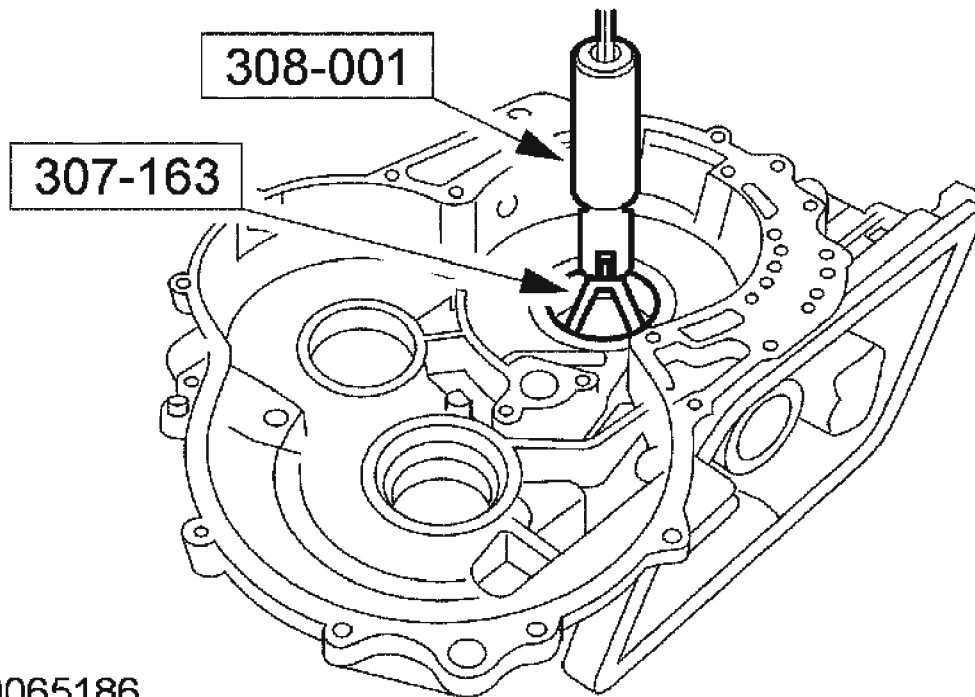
Removing Differential Case Bearing Cups Using Special Tool
